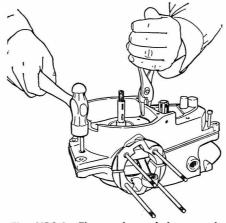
The crankcase halves can be separated as shown by using two long screws.
